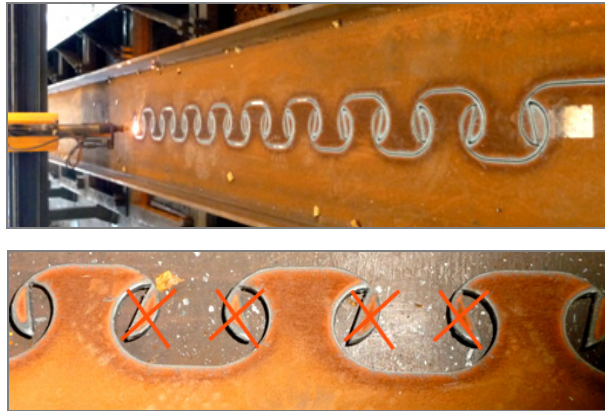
I-Beam IPE500 during cutting and MCL shape after gas cut
